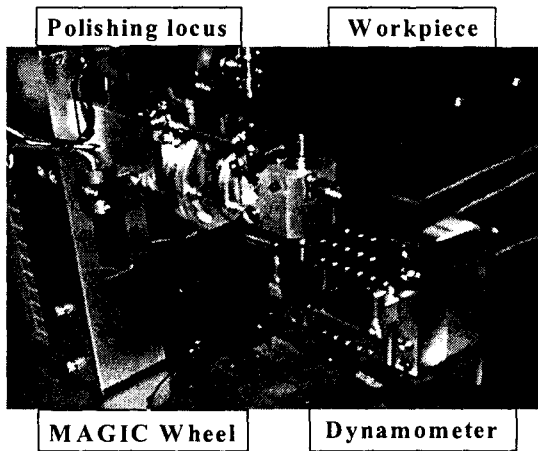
Photograph of MAGIC polishing machine and measuring the polishing pressure
